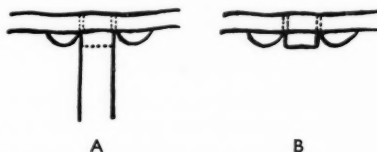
A, The ends of wire protruding from the inside of the bridge after having been threaded through the holes in the front. B, The end of one piece of wire has been bent (to accommodate the hinge) and the excess removed from both pieces.
